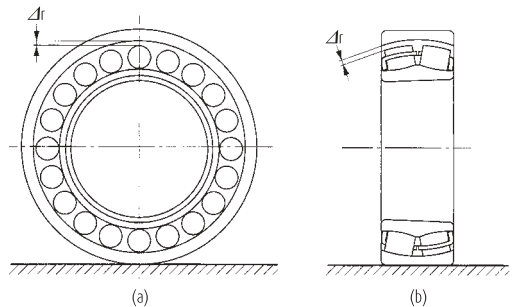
Clearance Measurement Point (Bearing Outside Diameter: Less Than 200 mm)
